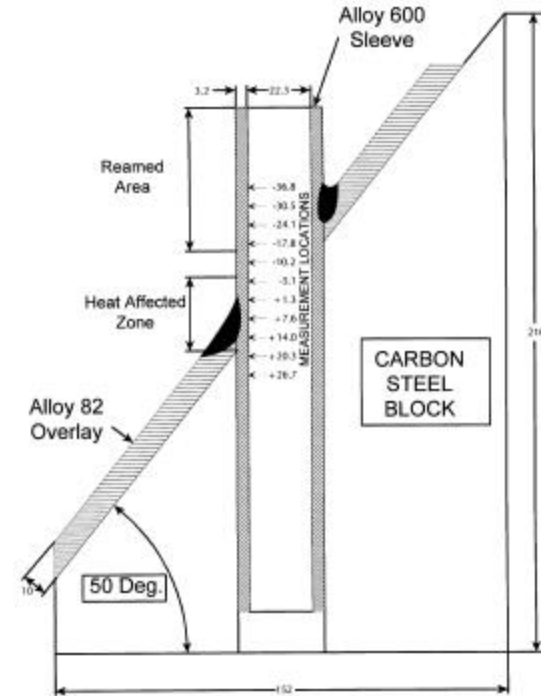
Alloy 600 50 deg. Heater sleeve penetration J-weld mockup specimen geometry with entire mockup and close-up of measurement locations shown.
